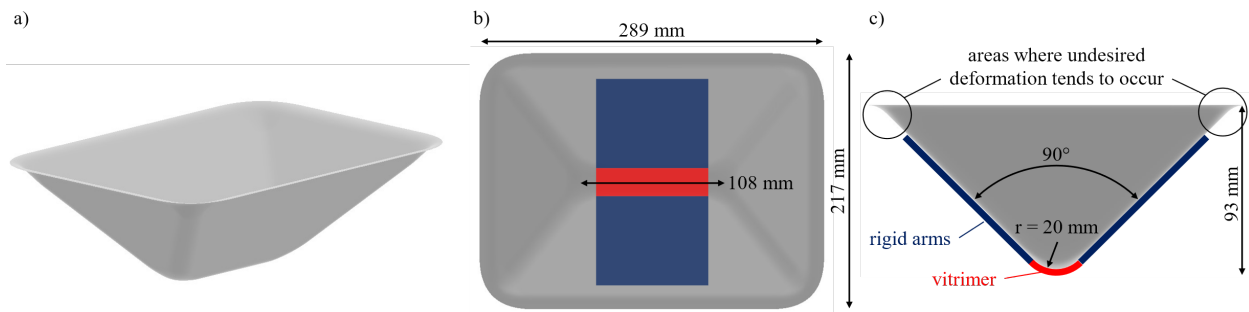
a) Overall target geometry for SPIF toolpath generation; b) bottom view, c) side view with indicated location of MMCRC sample and measurements
